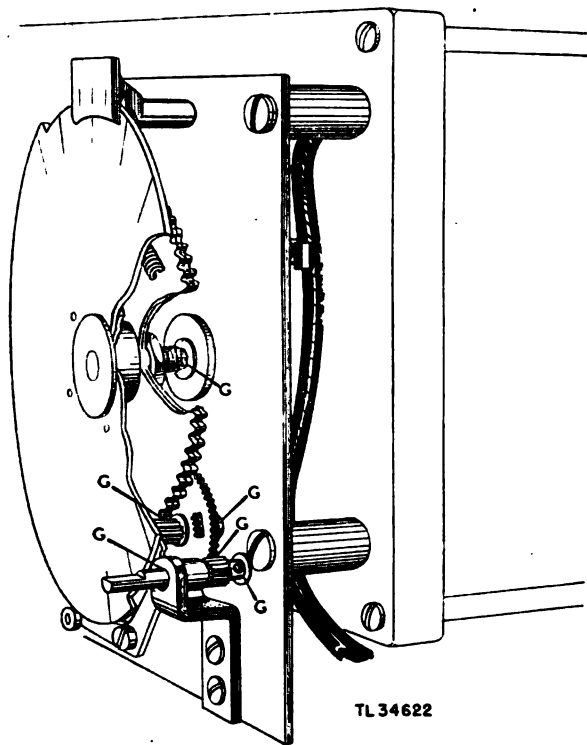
Lubrication of Signal Generator I-222-A, dial mechanism.
